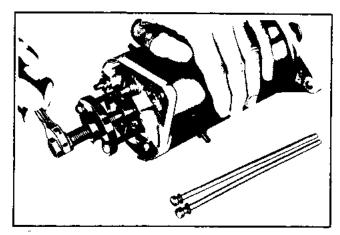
E-27J. Removing SIBA Starter-Generator Commutator End Cover
